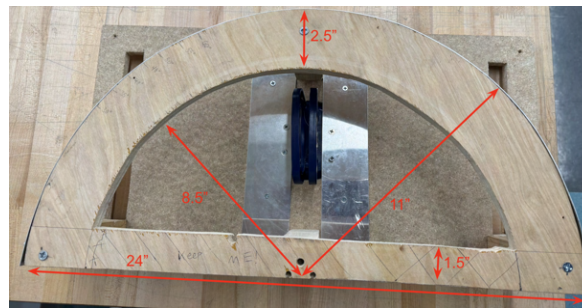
The top view of the arc is shown, with fasteners fixing it to the support posts, the aluminum surface on the outside, and the dowel pin hole for the arm assembly in the middle.
